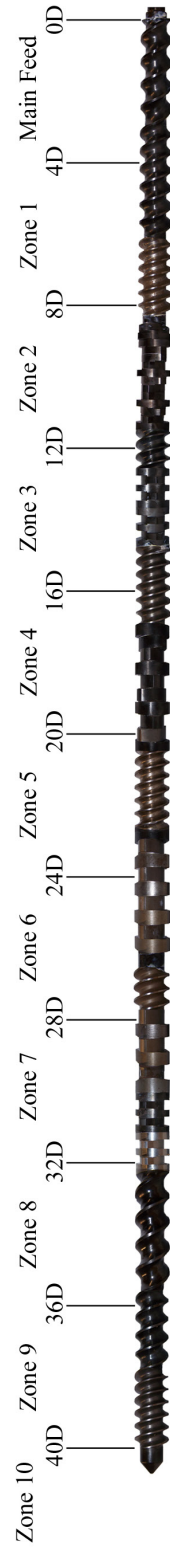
Twin Screw Extruder Screw named 2-9-09
